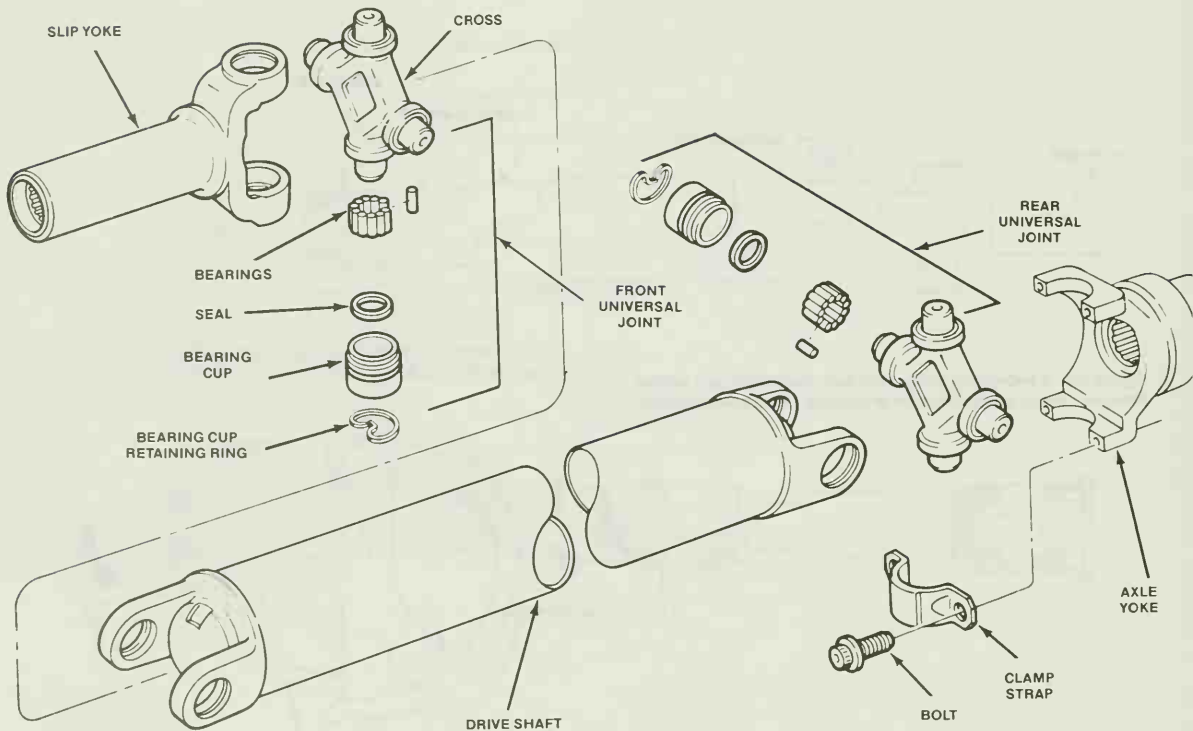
Exploded view of a drive shaft and universal-joint assembly. (American Motors Corporation)
